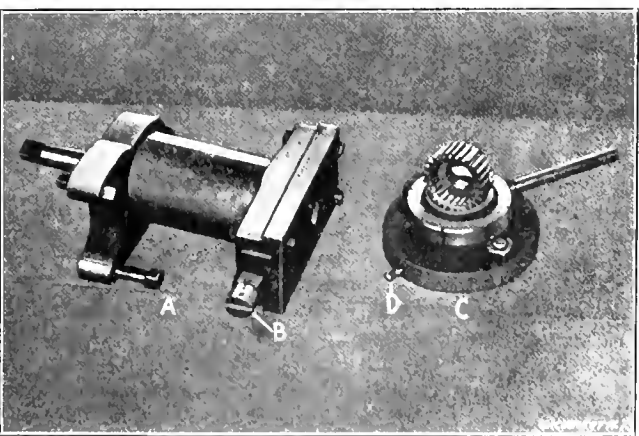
Milling Machine Attachment for Slotting inside of Ratchet Gears and Chuck for holding them
